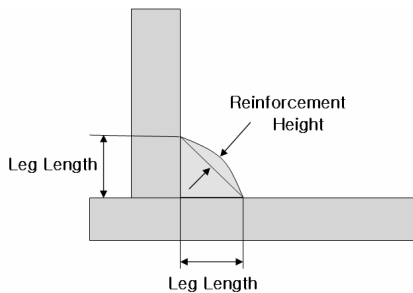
Nomenclatures for the fillet weld size.
